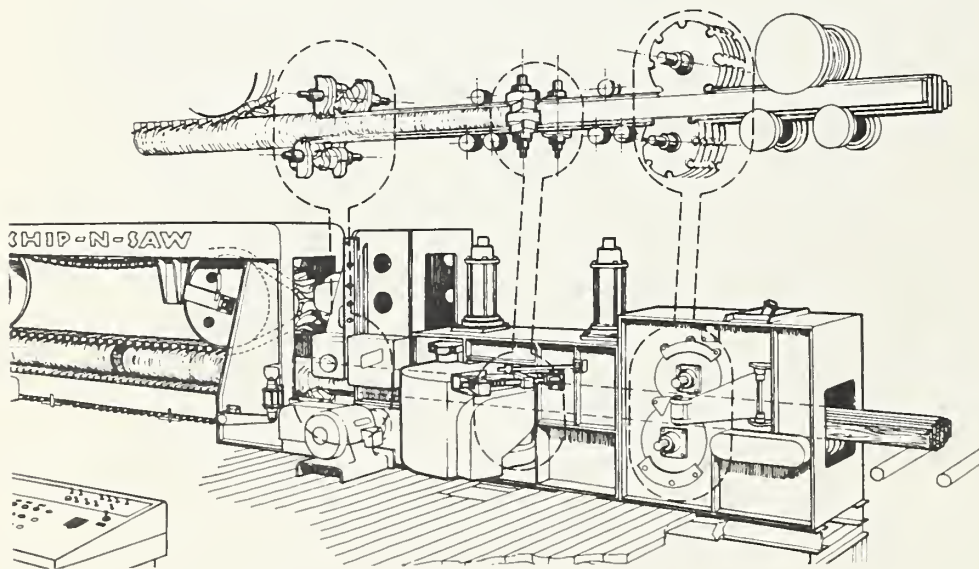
Cutaway sketch of Chip-N-Saw profiling a log in the same way that mouldings are machined. Usual feed speed is 90 f.p.m. to produce 3/4-inch chips. Motors total 553 hp. as follows: Drive, 28 hp. total; bottom chipping head, 50 hp.; top chipping head, 125 hp.; each of two side heads, 50 hp.; top saw arbor (carrying five 22 1/2-inch, 1/4-inch-kerf saws), 125 hp.; bottom saw arbor (carrying five 19-inch saws), 125 hp. (Canadian Car sketch).
